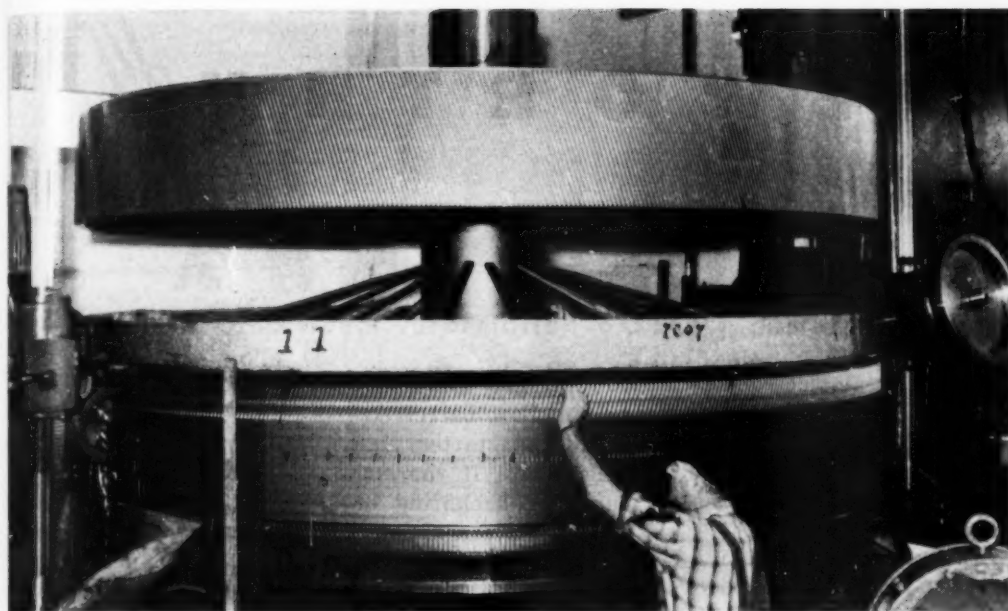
Left — Hobbing of large bull gears for ship propulsion. Teeth are completed on the upper wheel and hobbing has just been started on the lower wheel
